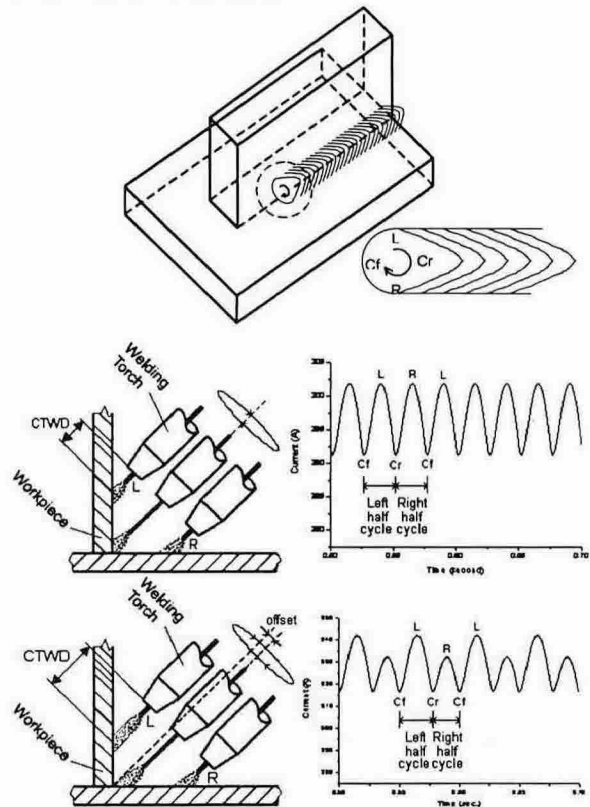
Geometry of fillet welding with rotating torch and the current signals
